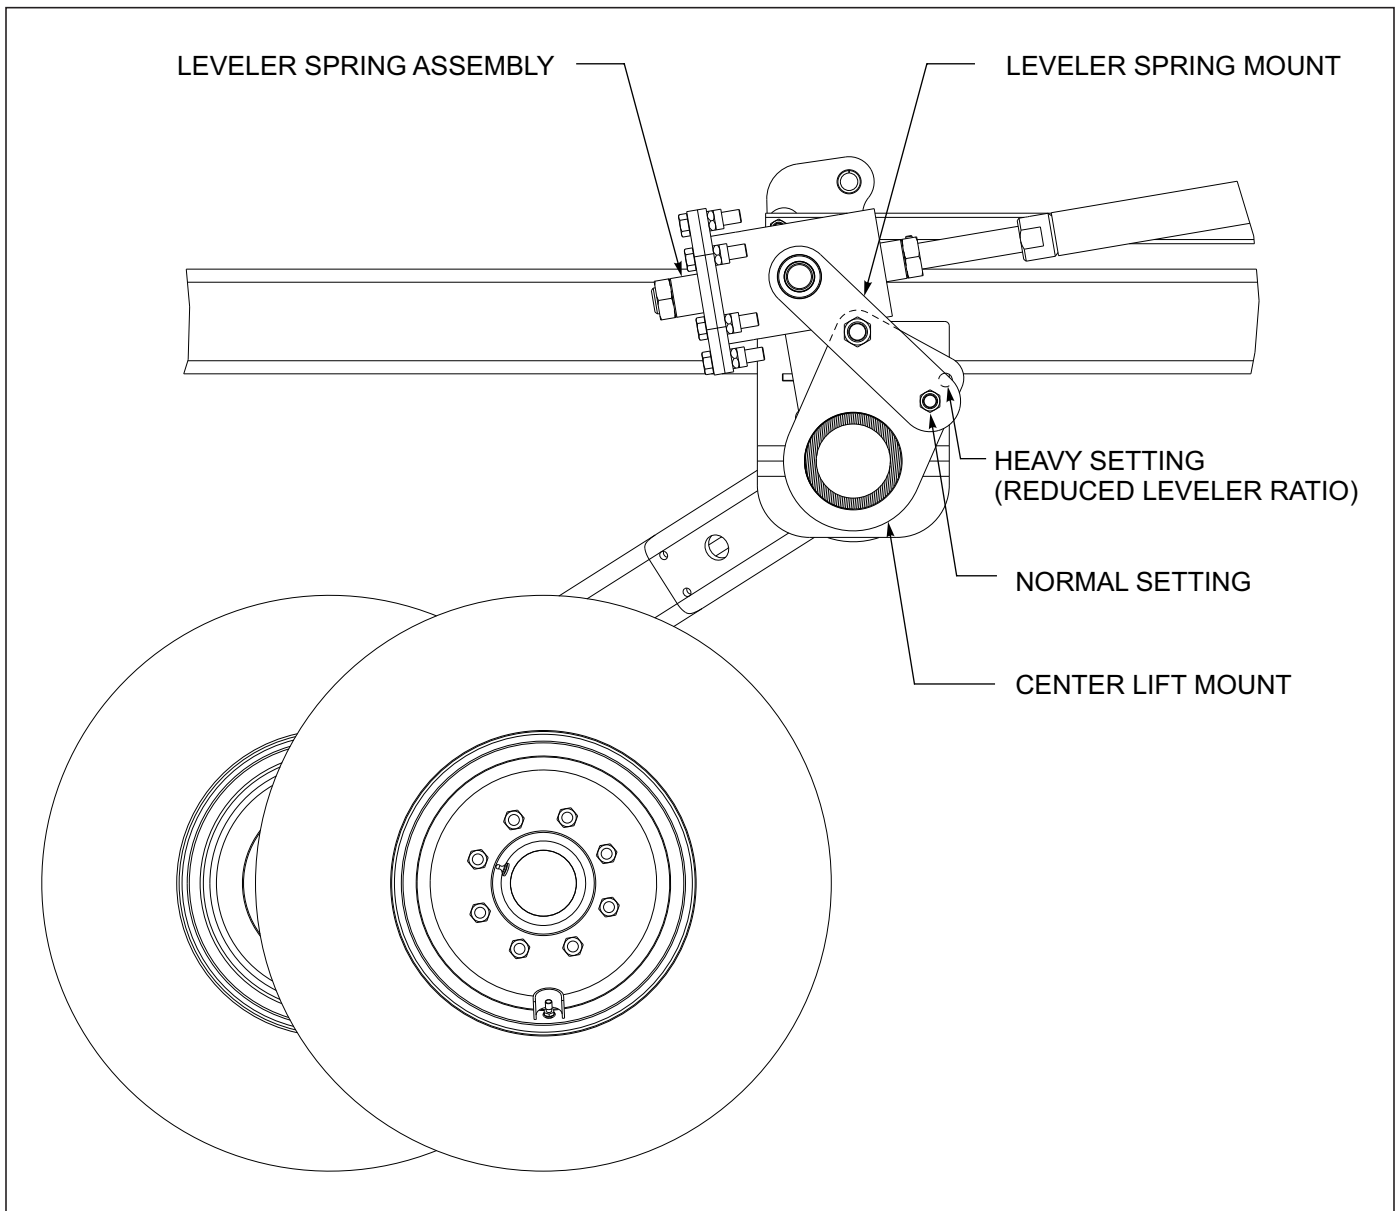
Hydraulic Leveler Gauge Adjustment
